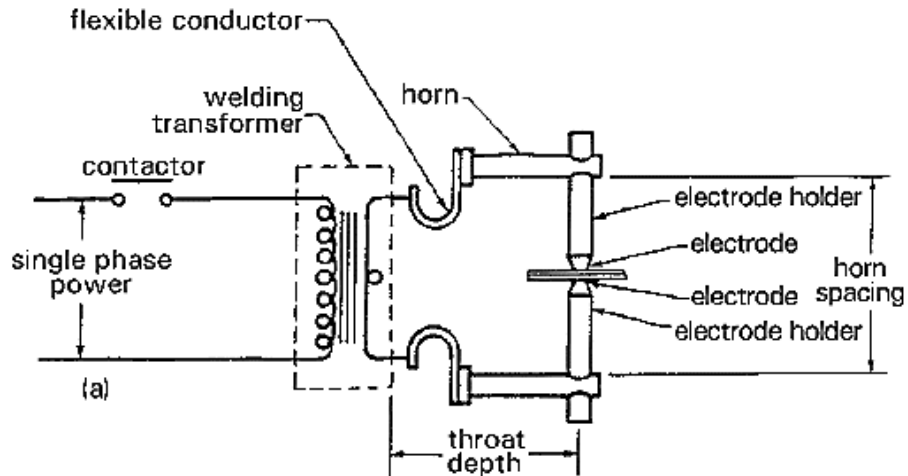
Resistance Spot Welding Machine Schematic [21]
